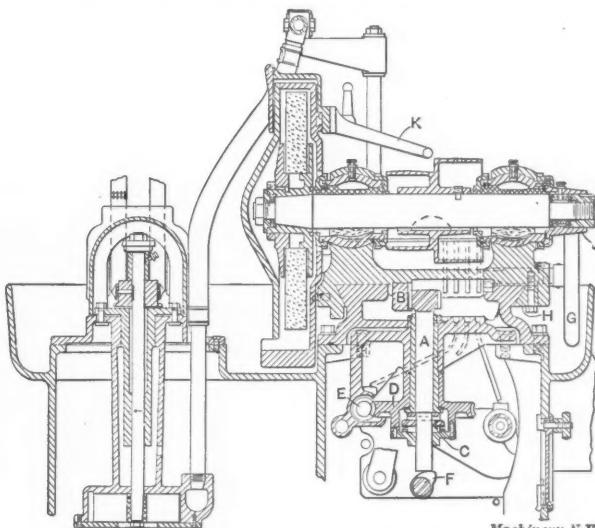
Cross-section through Grinding Head Spindle, showing Centrifugal Pump and Improvements in Cross Feed
